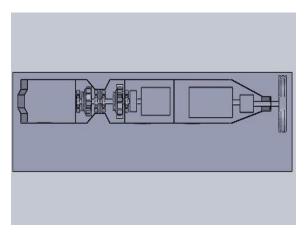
, Placement of machine, gear box, impeller for lift, impeller for thrust and holder (top view)
